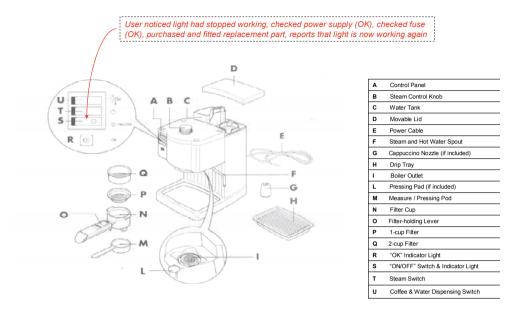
Example exploded assembly (reproduced from a de Longhi user manual) with superimposed life-cycle data
